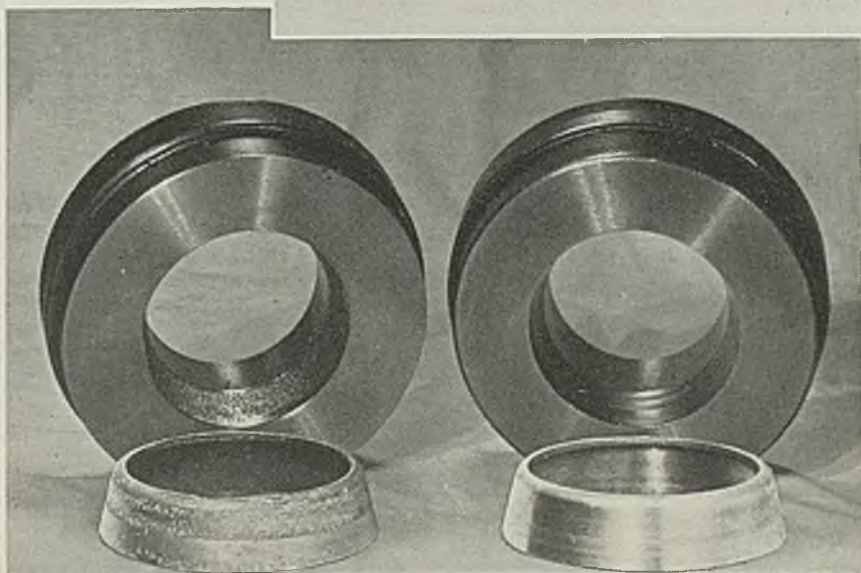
(top) — A typical small closure die. Fig. 9 (center) — Draw ring or blanking die of graphitic steel containing silicon. Fig. 10 (bottom) — The graphitic steel cage drawing die at the right made 309,000 pieces; the former die at the left, 10,000 pieces. The product of each die also is shown
